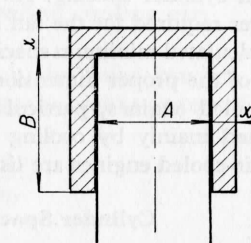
Surface area around the cylinder for heat transfer to the cooling medium.
